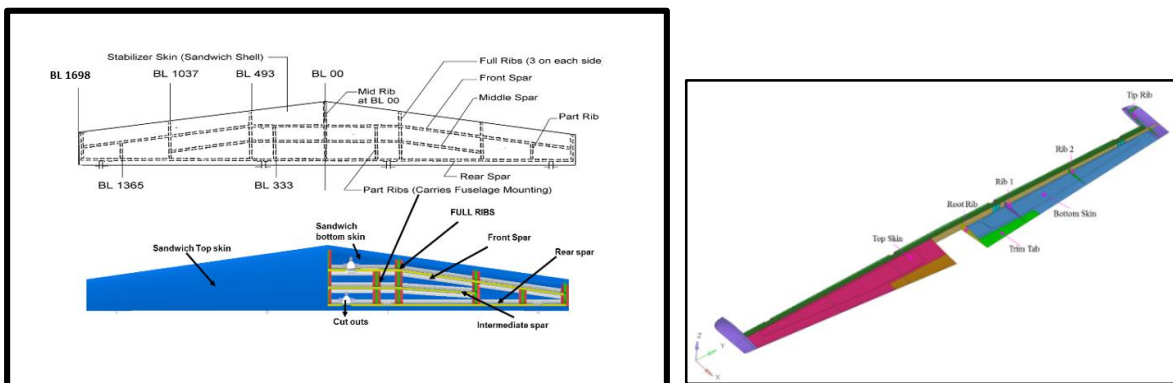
Schematic of Horizontal Stabilizer (HS) & Elevator
